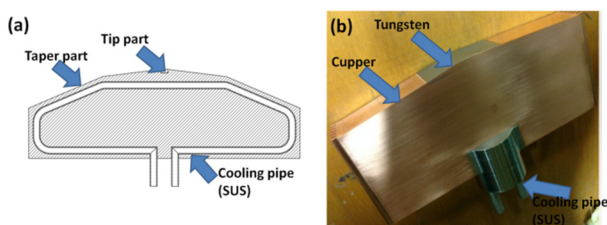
(a) Schematic drawing of horizontal-type collimator jaw (cross-sectional view), and (b) the test model.
